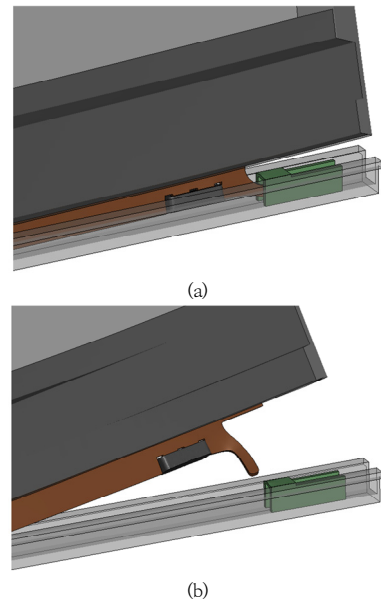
Deformed shape of a guide shoe and stopper (a) 450 J, (b) 1000 J
